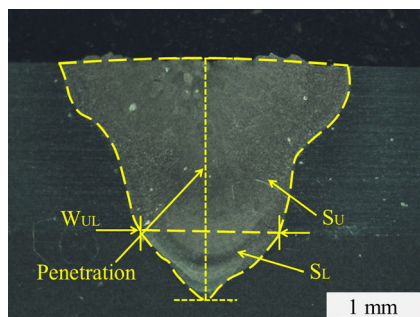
The typical weld cross section, penetration, fusion ratio, and the weld width between upper and lower sheets (W_{UL}) were measured through cross section
